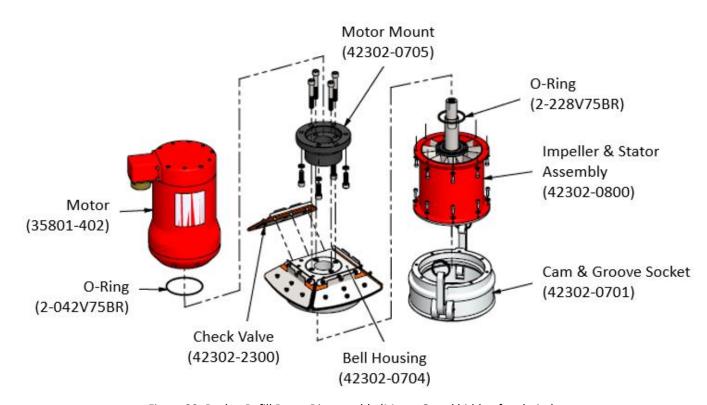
Bucket Refill Pump Disassembly (Motor Guard hidden for clarity)
